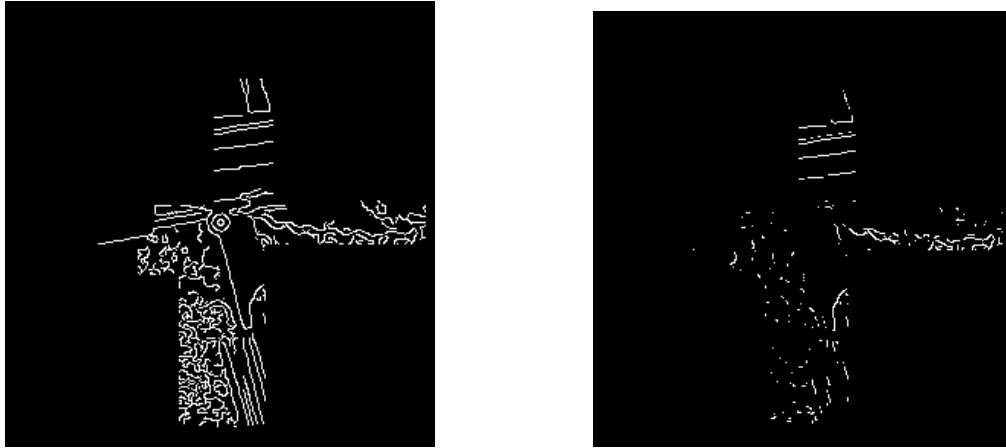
Top: the same edges after blanking out impossible chip locations (sector masking). Bottom: the result after removing everything that isn't moving (background subtraction) — only the tool holder outline and moving chip edges remain.
